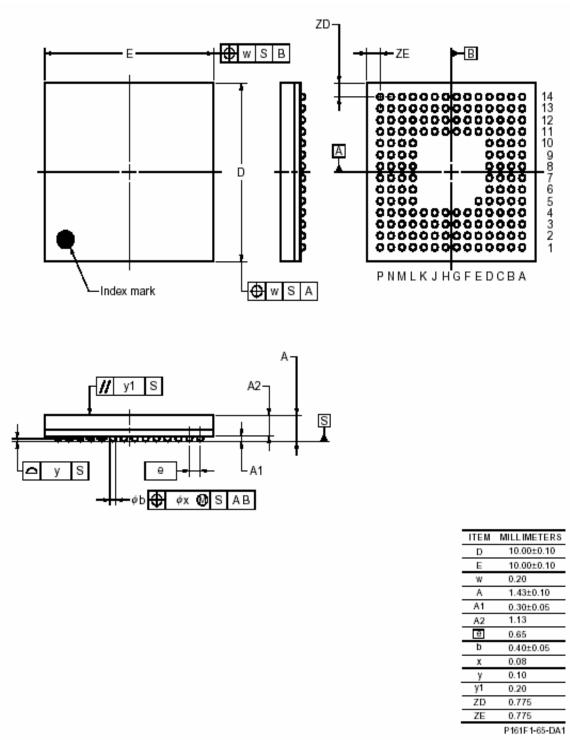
161-Ball FBGA Mechanical Drawing
